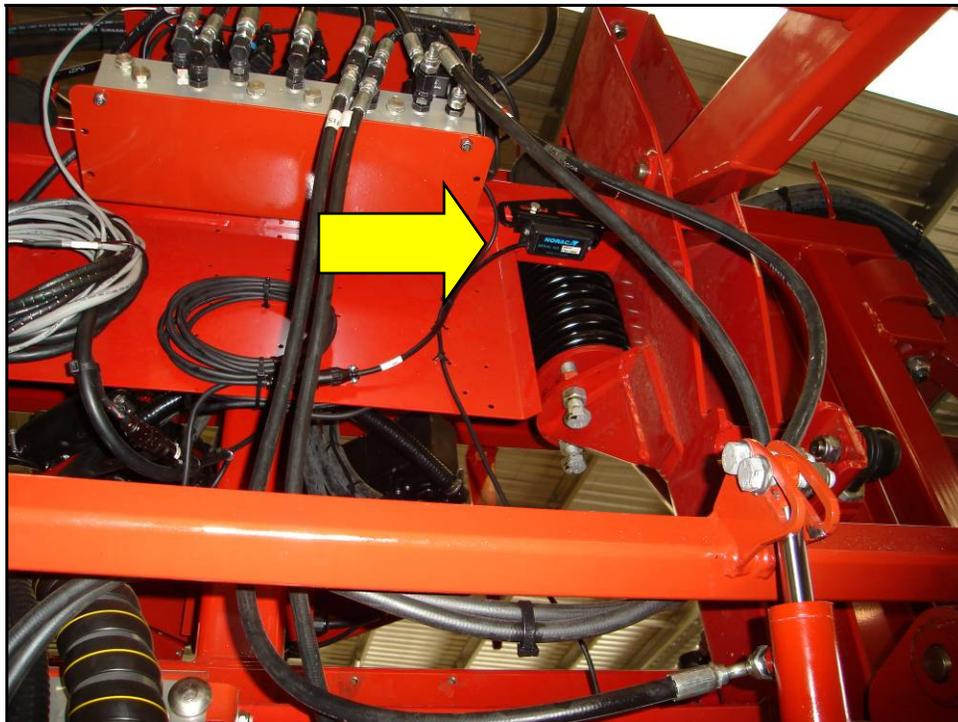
Chassis Roll Sensor Mounting (Viewed from the front of sprayer)
